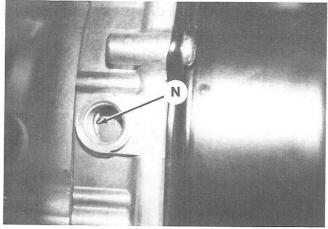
Piston is at TDC (top dead center) when "T" mark on flywheel is aligned with timing notch (N). The second flywheel mark is the ignition timing mark.
